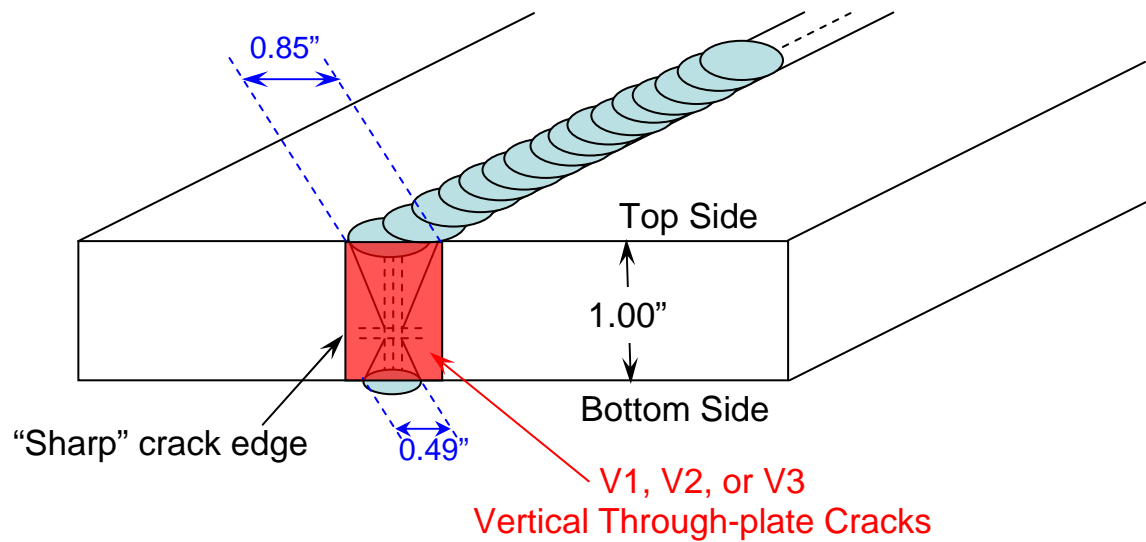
Through-the-plate cracks across the weld (V1, V2, and V3).
